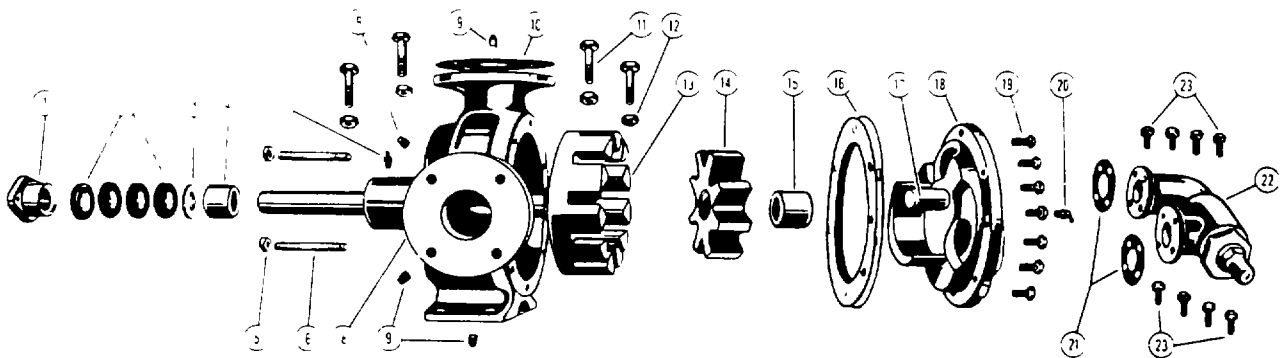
EXPLODED VIEW MODEL LQ32 PUMP
